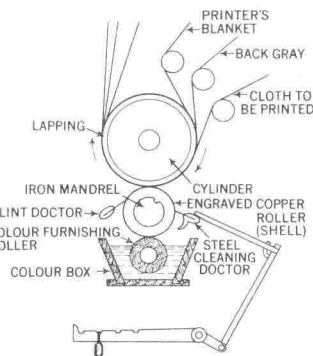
WORKING PARTS OF A ONE-COLOUR TEXTILE PRINTING MACHINE
